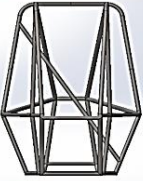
A B and B Pedal Placement, Roll cage with clearance
